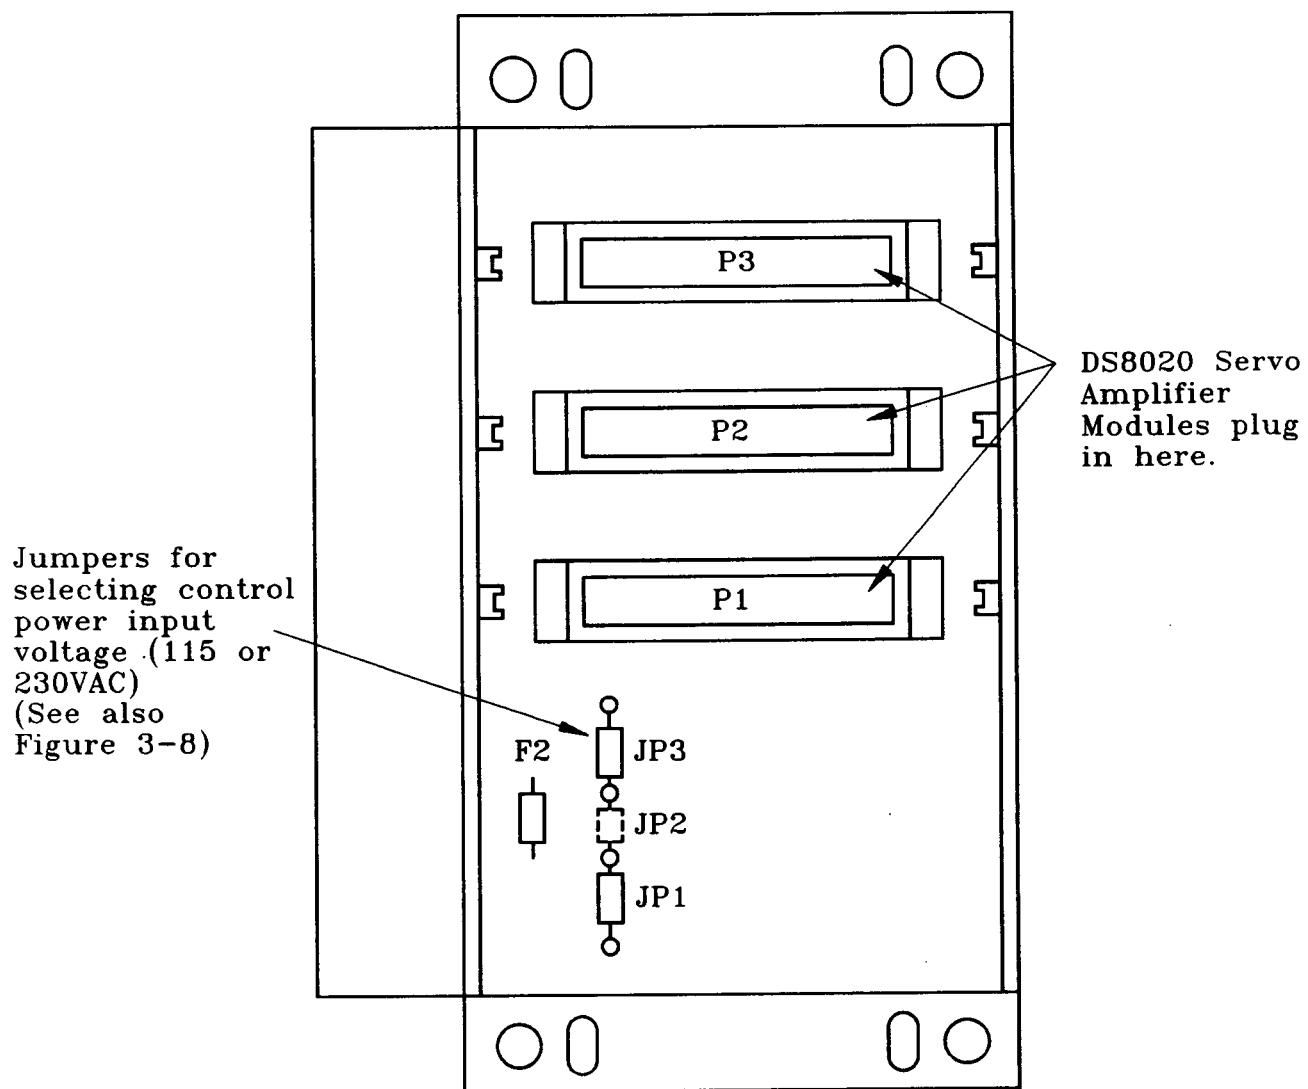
Inside View Of DSHR Mounting Rack (DS8020 Servo Amplifier And Power Supply Module Removed)
